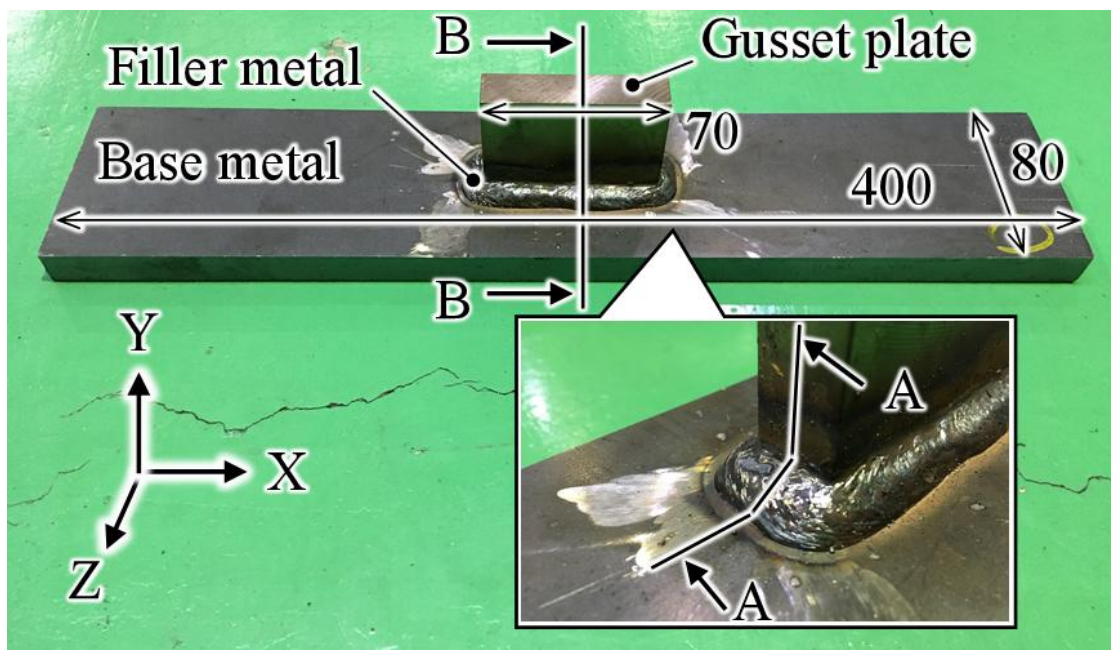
Gusset welded joints and their dimensions (Unit: mm).
